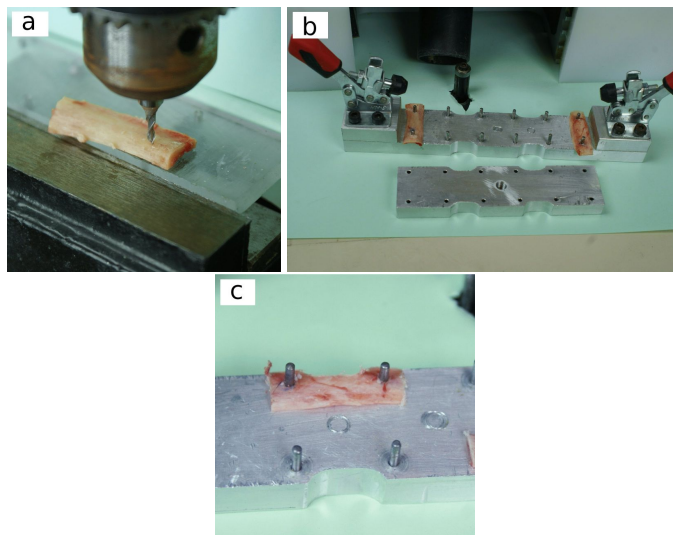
Drilling of the bone slice (a), assembly of the slice on the machining tool (b), and coupon sample with half geometry machined (c).
